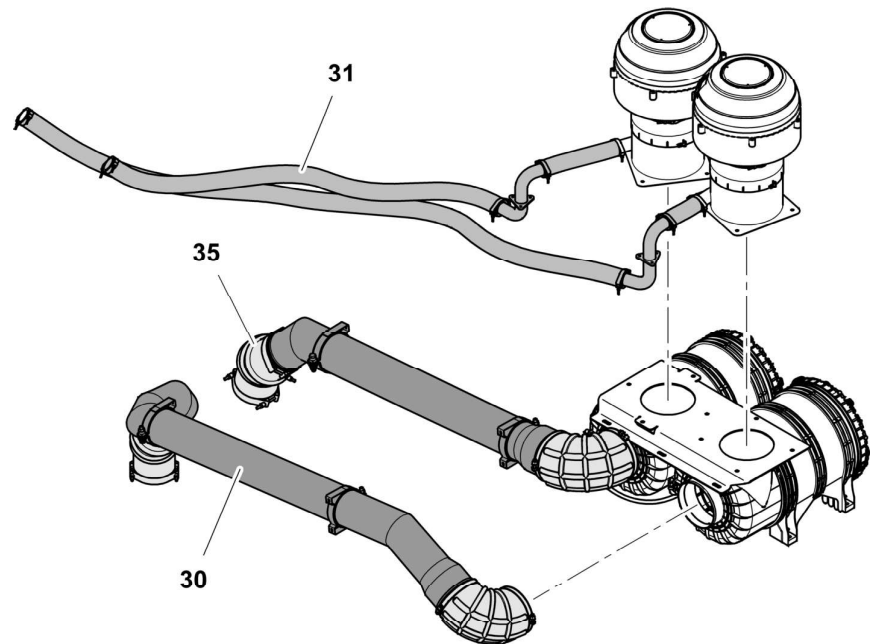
Air intake hoses, tubes and elbow tubes
